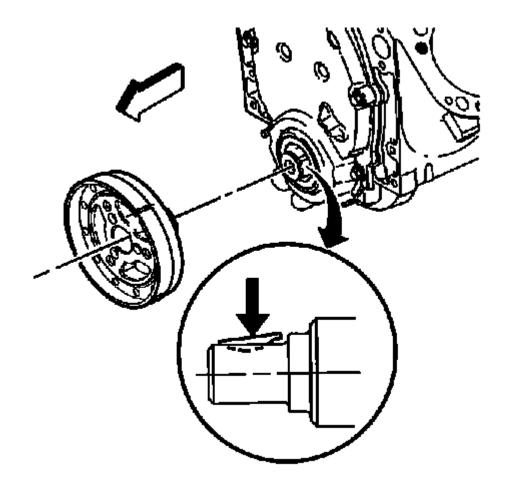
View Of Crankshaft Balancer Courtesy of GENERAL MOTORS CORP.
